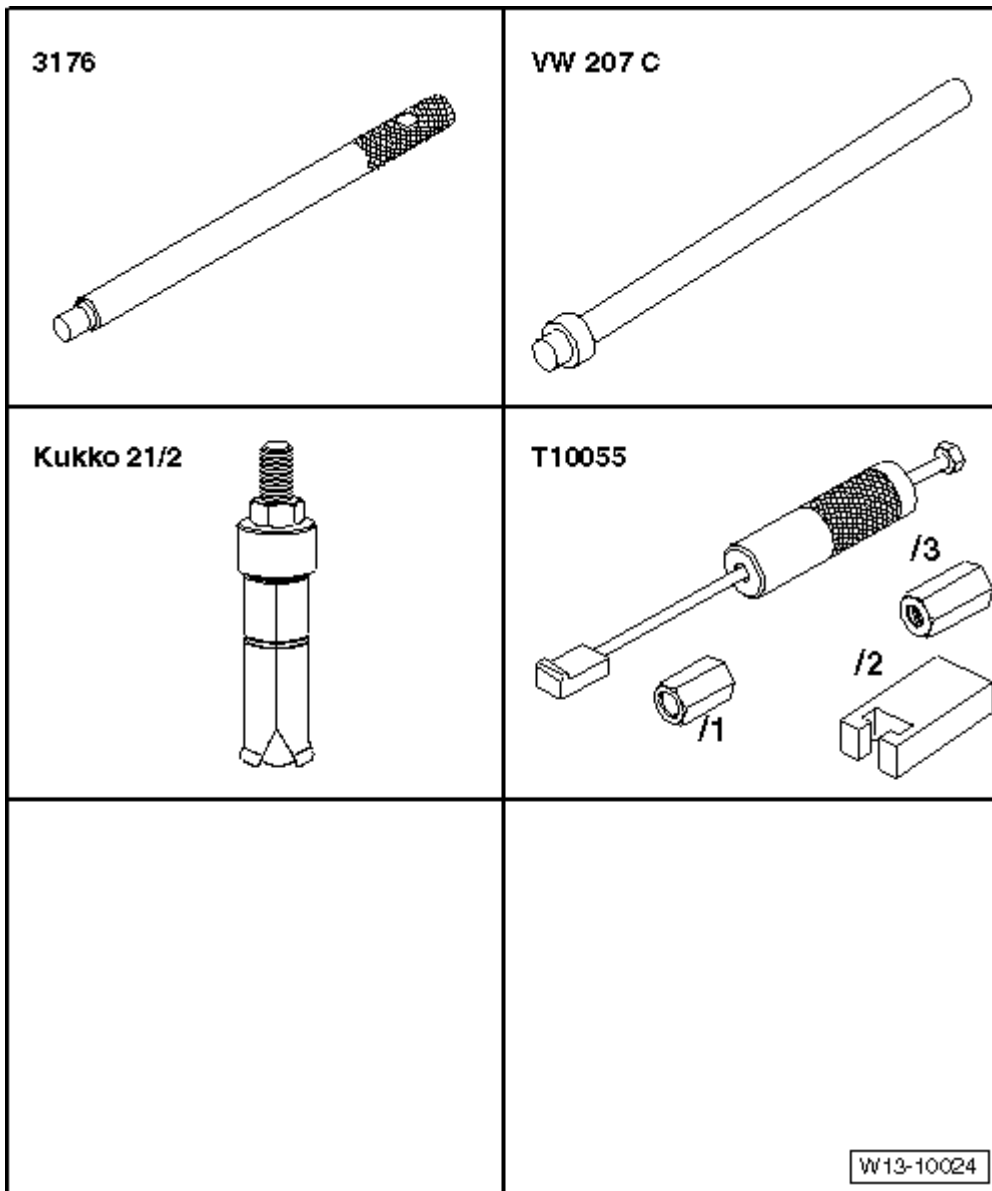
Identifying Centering Mandrel 3176 And Special Tools
